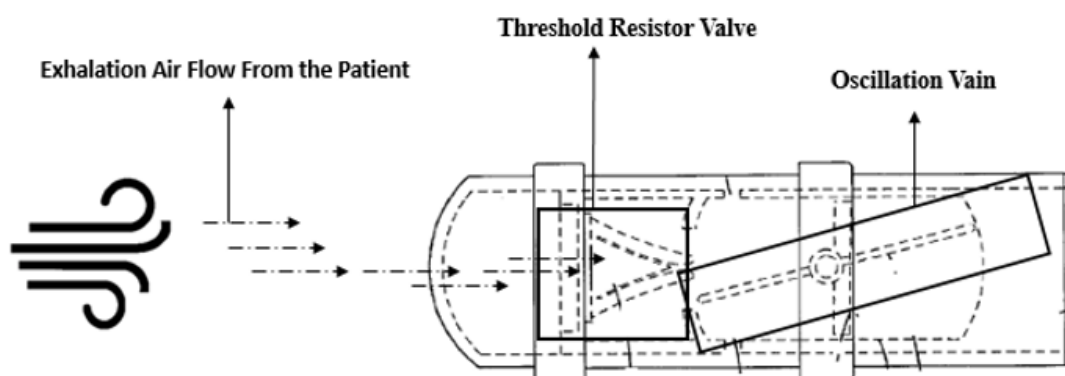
Mechanical components arrangement (threshold resistor valve and oscillation vain) employed in type B devices [68]
